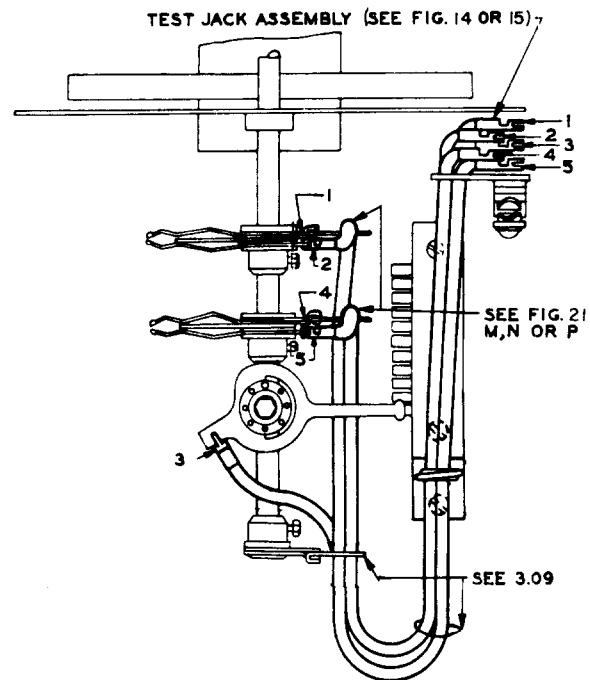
Types of Cord Holders Which Are Part of Test Jack Assembly
